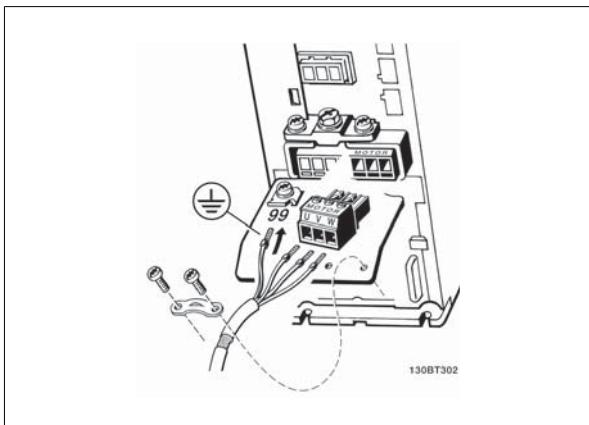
Motor connection for units sizes 12 and 13 IP20 Open Chassis drive types (230V to 5HP, 460V/575V to 10HP)
